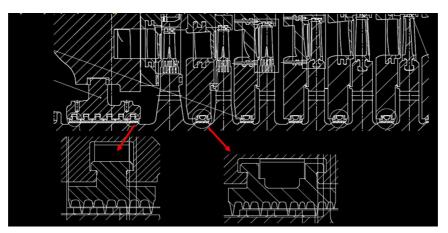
Steam turbine packing of distributing rotors ETU23.
